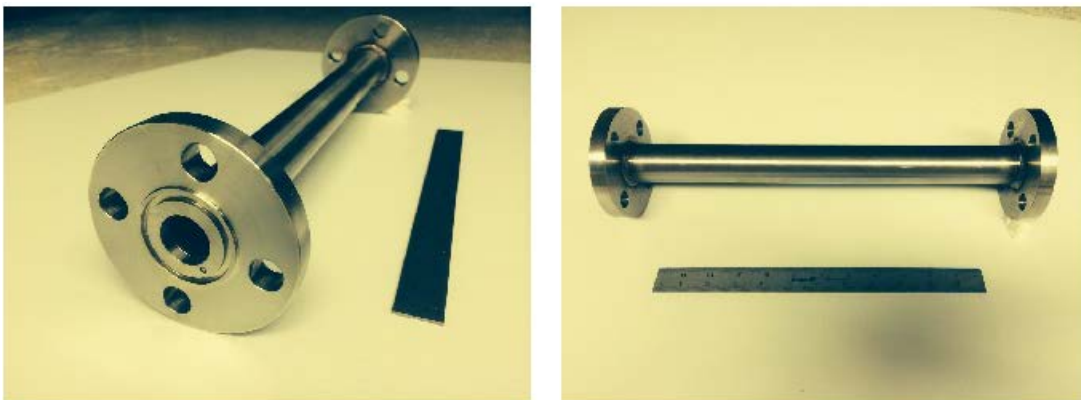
Reactor Assembly Receiver/Service Side and End Views.
